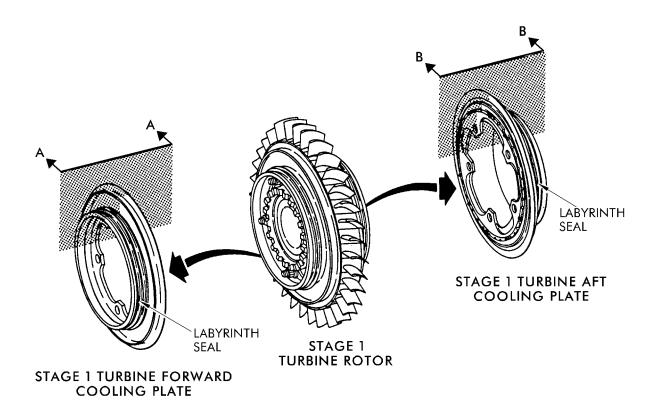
(T700) Labyrinth Seals for Wear; Inspection (Sheet 2 of 2)
